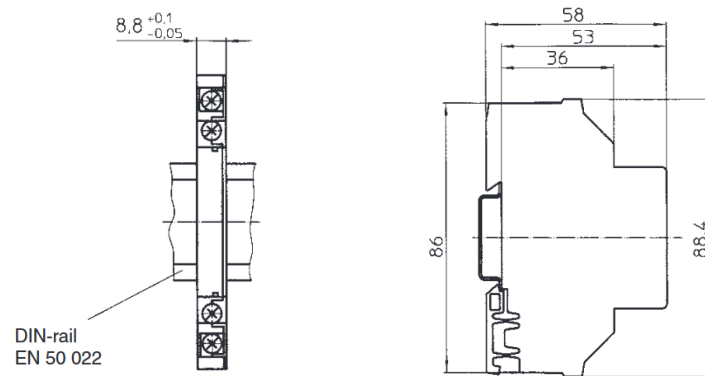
Case drawing of the USB-DC-PD. All dimensions in mm.
